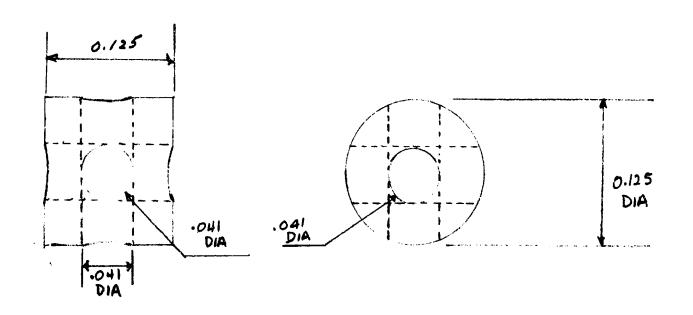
Transformer, Coaxial, Dielectric (BX2367322)
